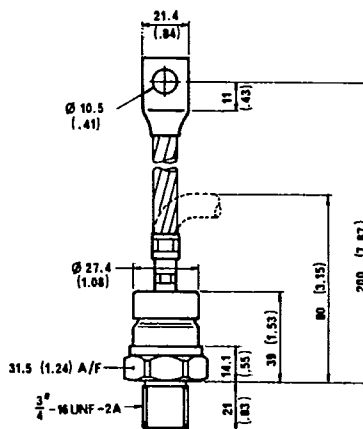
Mounting Torque 2.50 - 2.77 KgM threads not to be lubricated Weight: 250 grams dimensions in mm (inches)
